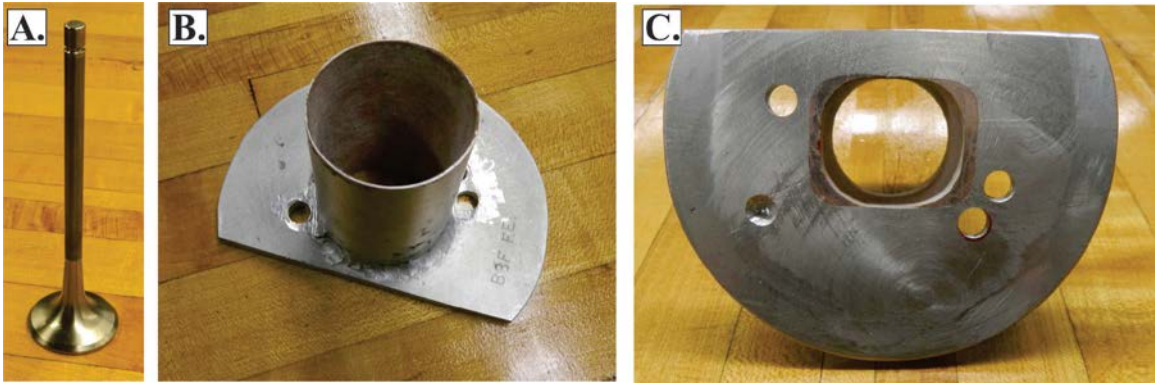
Exhaust Valve (A) and Exhaust Exit Piece (B & C).
